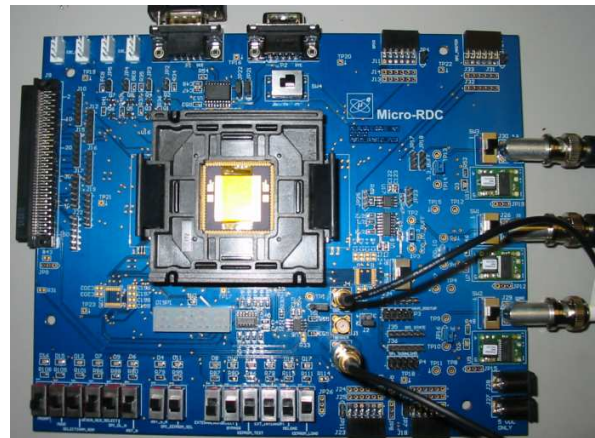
Mini-PnP SASIC Silicon Package in 172 pin CQFP with Socket in Assembled Evaluation Board.
